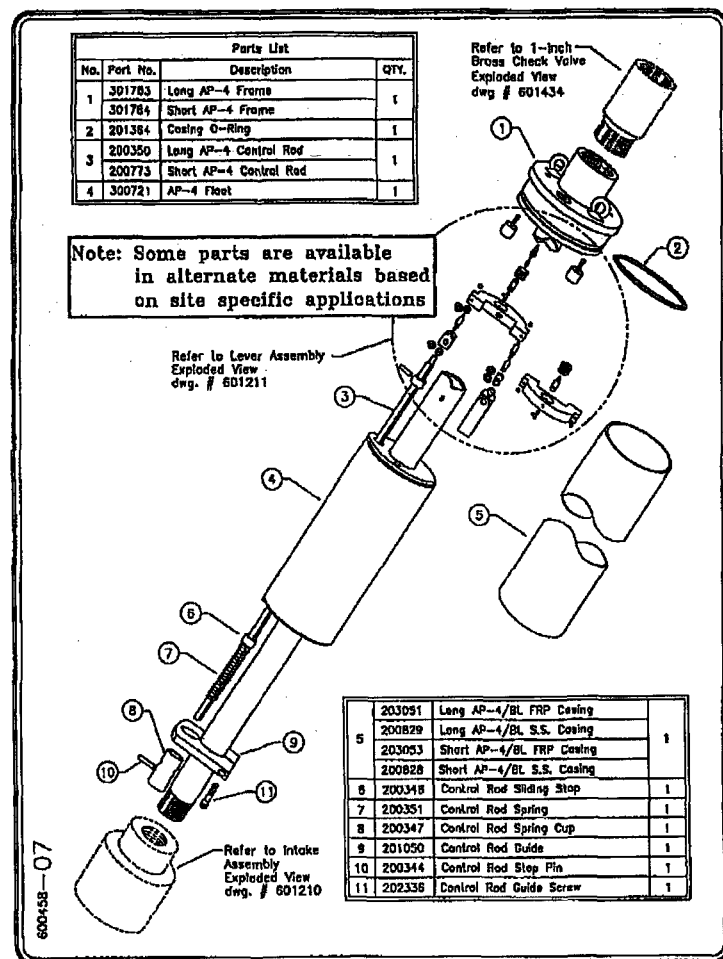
Exploded View of a Bottom-Loading AutoPump AP-4 (Long & Short)
